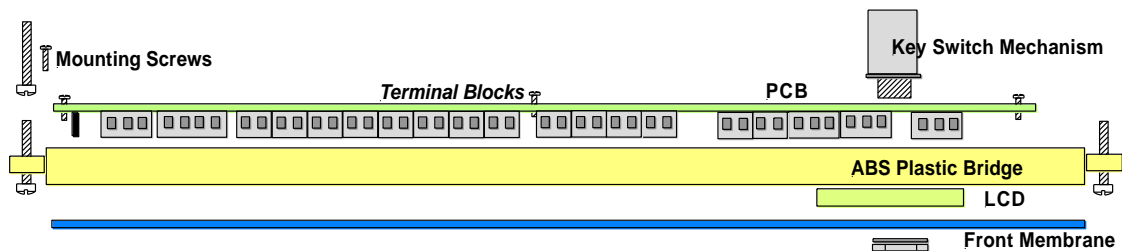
Exploded Top View of Membrane, Bridge and PCB
